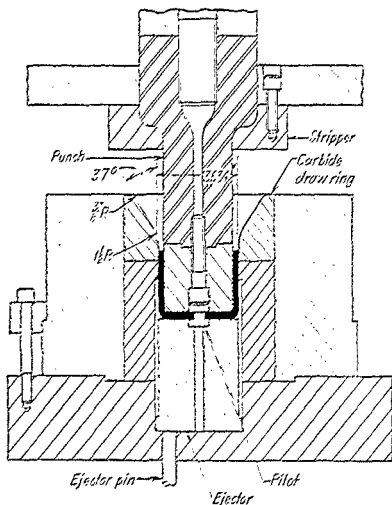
Cupping die with a carbide draw ring. (Worcester Pressed Steel Co.)
